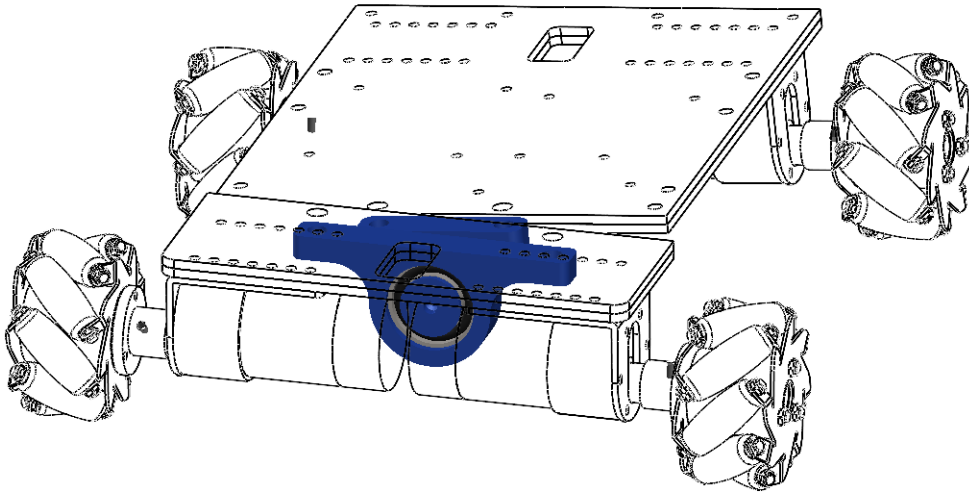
Draft illustrating the connection between the front and rear parts of the robot.
